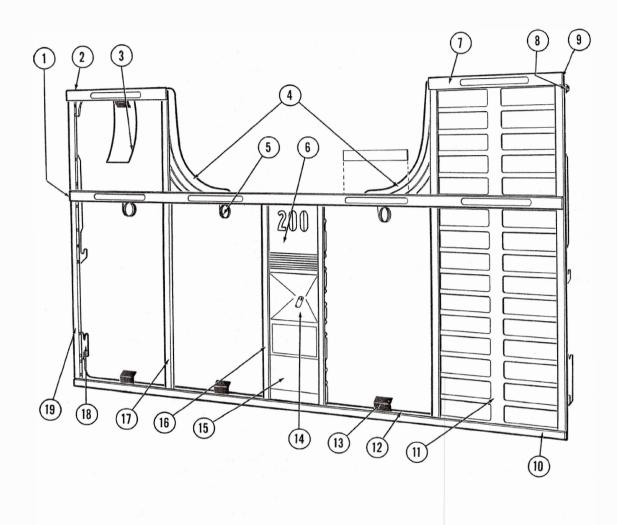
PROGRAM HOLDER ASSEMBLY 2400
